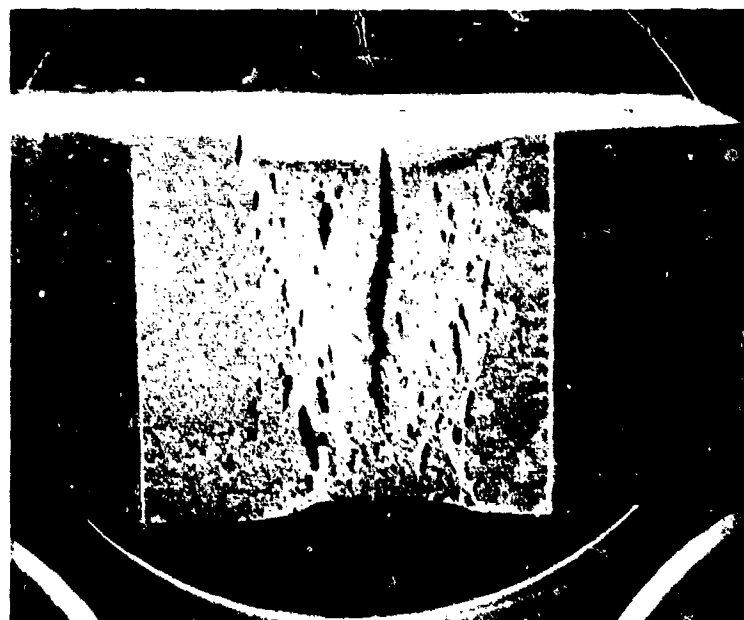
Fatigue fracture surface of A-588 steel, 8x.
